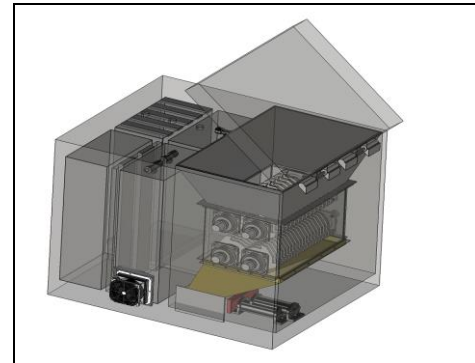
Sectional view of the internal assembly, showing the shredding subsystem, evaporation chamber, compaction pistons, and UV-C module
